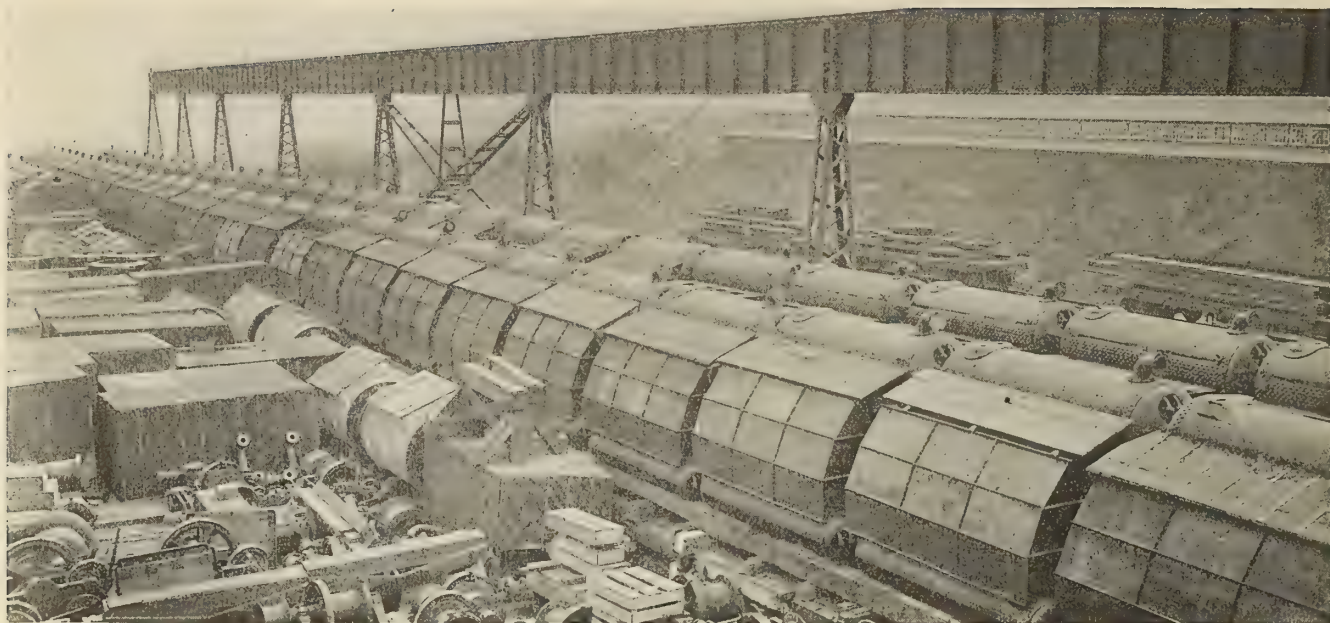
Watertube Boilers to Be Installed on Destroyers
